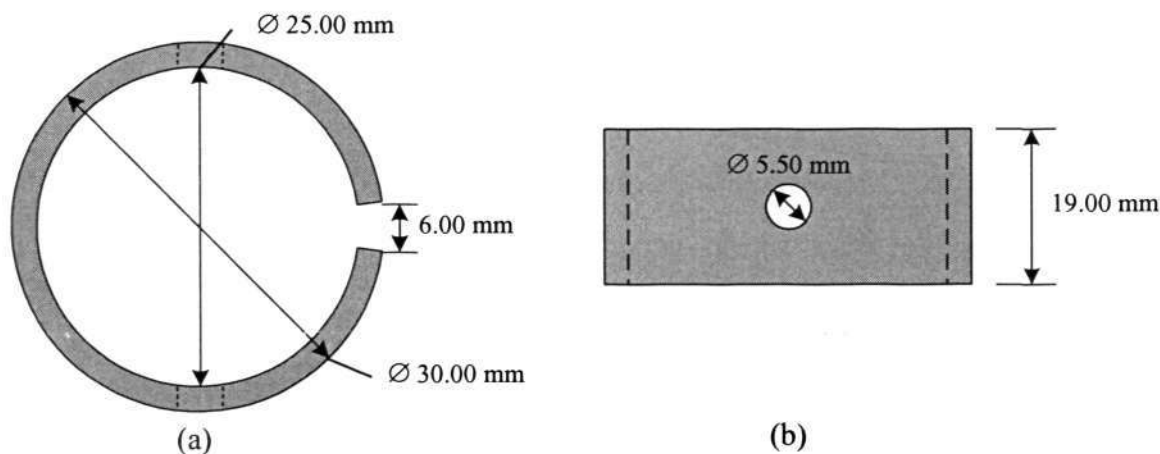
Geometric dimensions of C-ring specimen. (a) Side view. (b) Plane view
